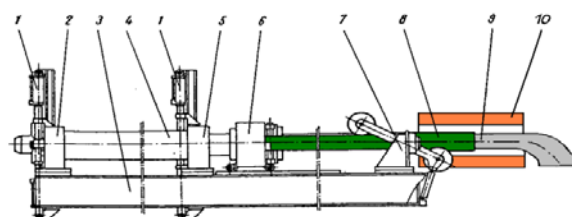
Cinematic structure of bending equipment with mandrel pulling and induction heating: 1- hydraulic cylinders; 2 and 5- support bearings; 3- frame; 4- linear hydraulic motor; 6- pusher; 7- locking pawl; 8- pipe; 9- supporting mandrel; 10- heating coil
